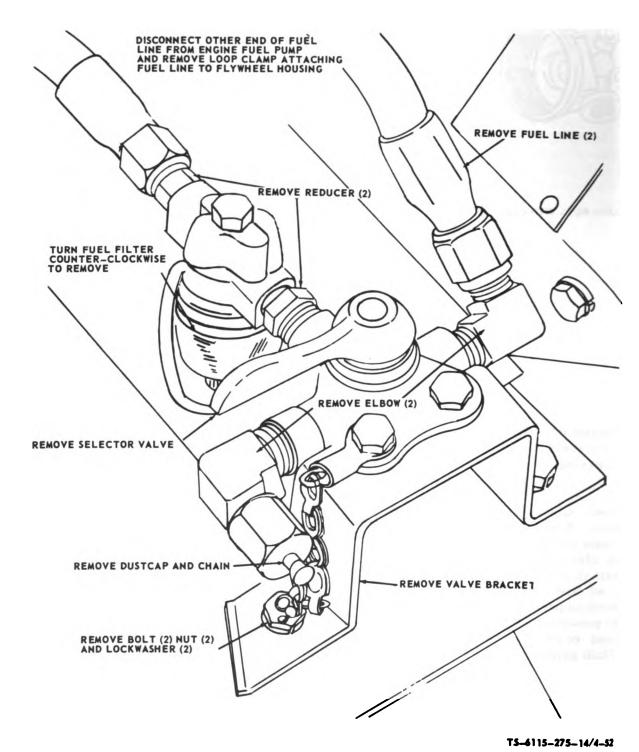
Fuel lines, fuel filter and fuel selector valve, removal and installation (Model MEP-023A).
